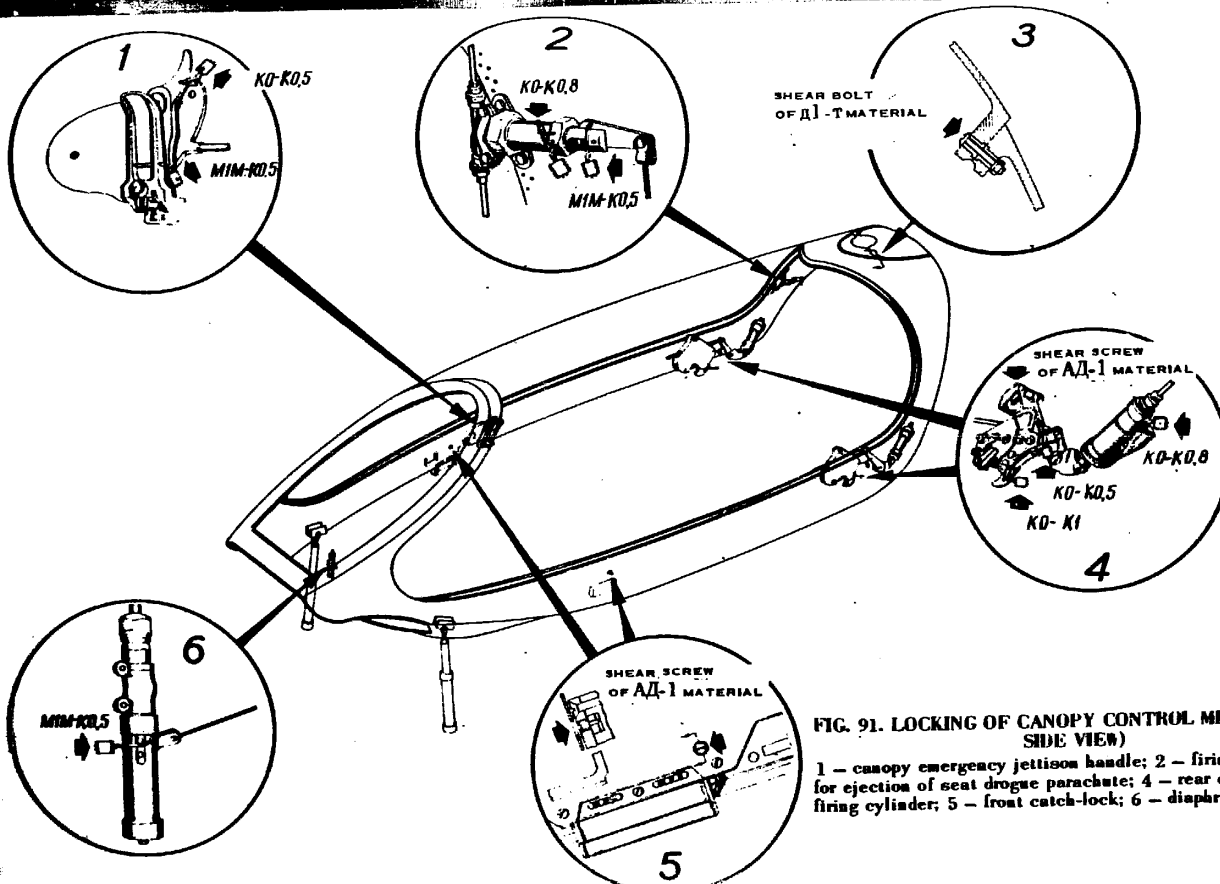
LOCKING OF CANOPY CONTROL MECHANISM (LEFT SIDE VIEW)
